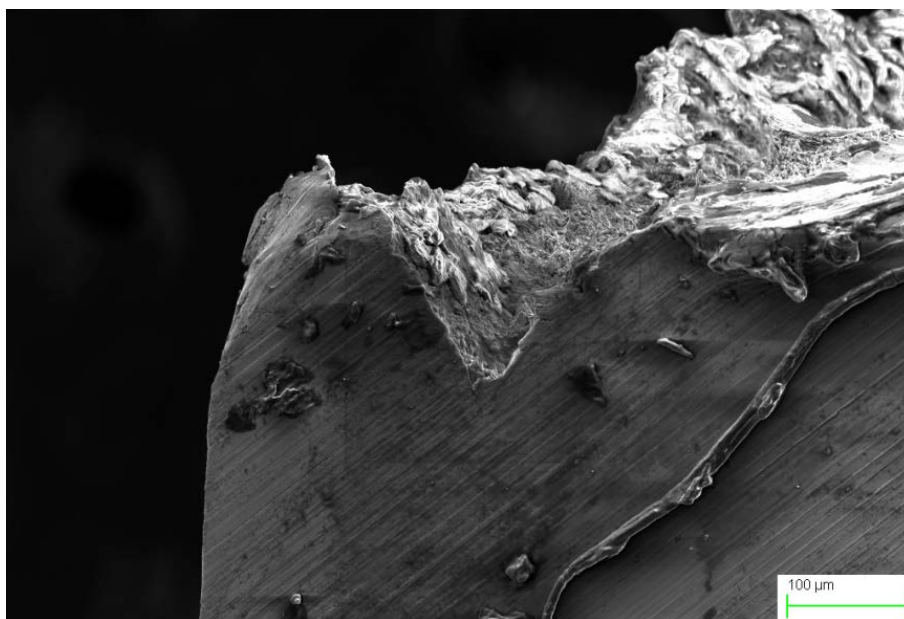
Fracture path of 625 PLUS No. 1.
